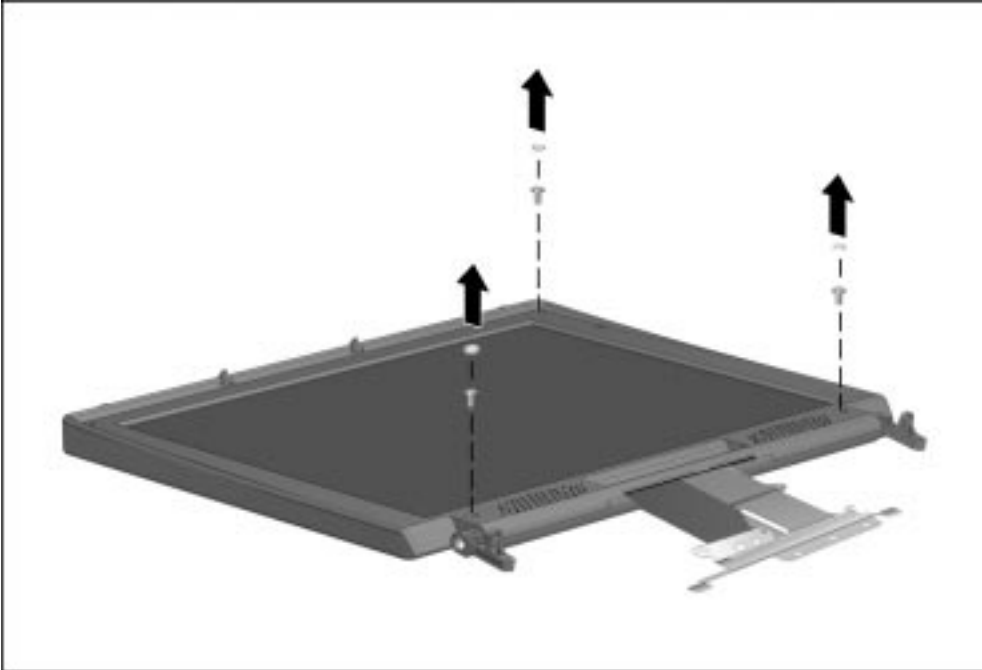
Removing the Display Bezel Screw Covers and Screws on the 14.1-inch Display
